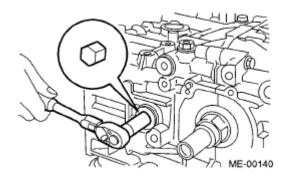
Identifying Service Hole Plug Courtesy of SUBARU OF AMERICA, INC.
